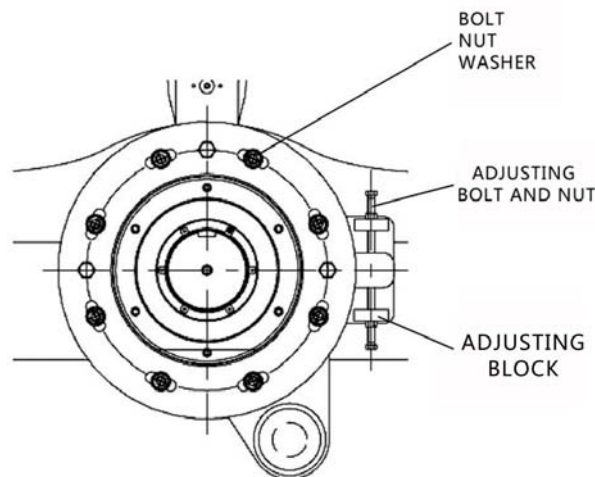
Adjustment of backlash for gear wheel and pinion
